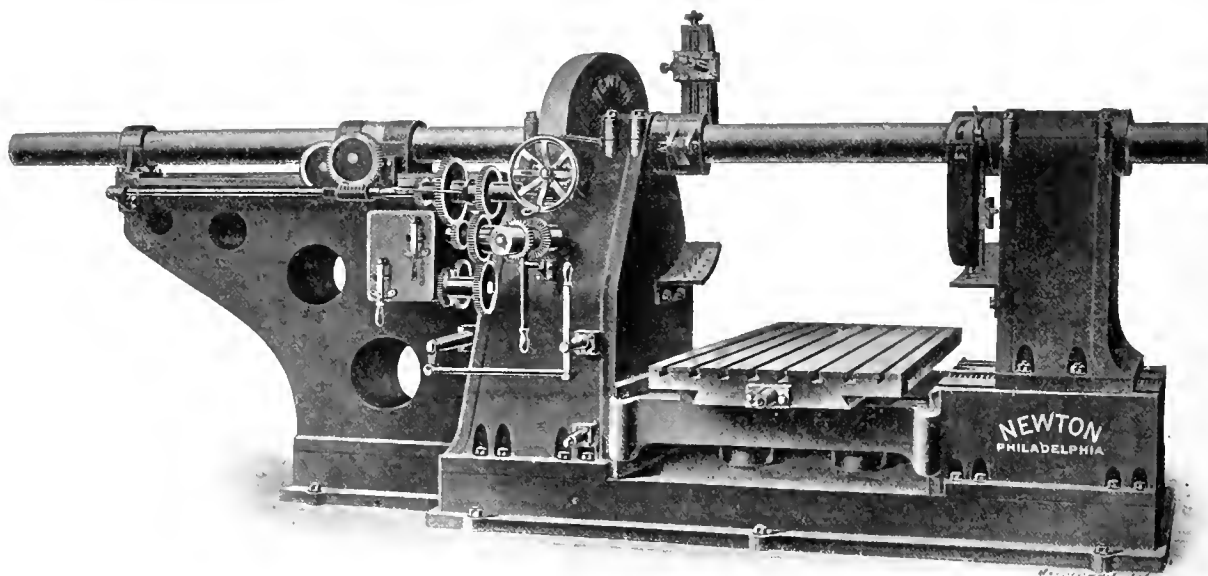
Newton Cylinder and Valve Chamber Boring Machine.
